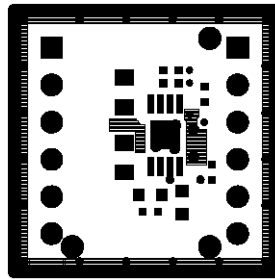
SMP-TPS7A1601-MVK Board Solder Mask – Top Side
